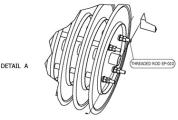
WHEEL ASSEMBLY HIGH RISE EP-101H
